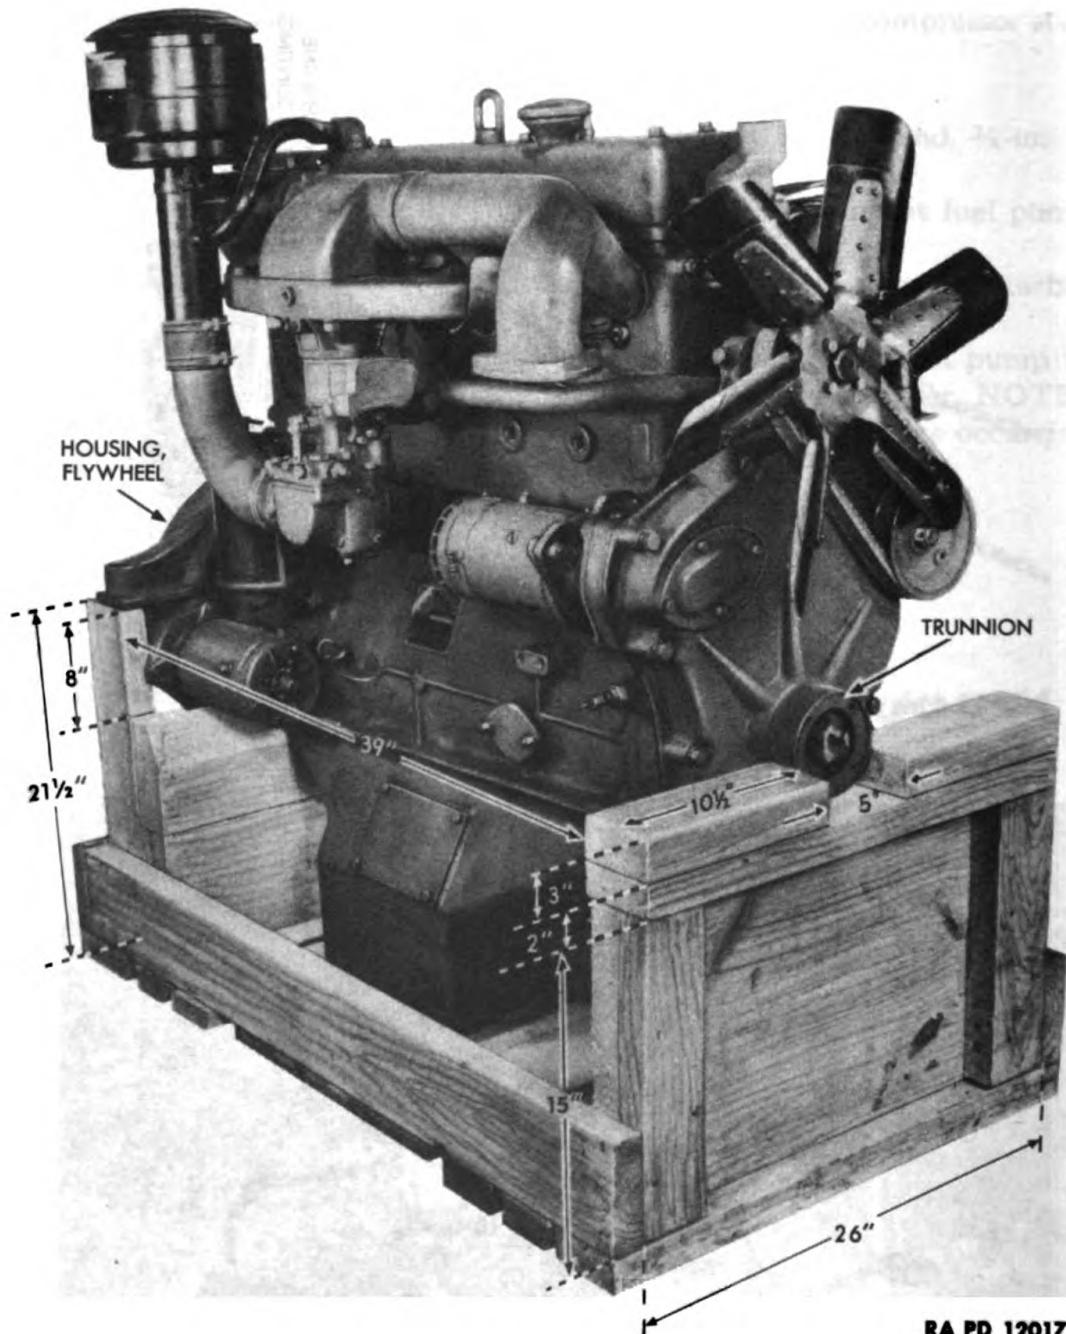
Engine in Engine Stand for Preliminary Disassembly
